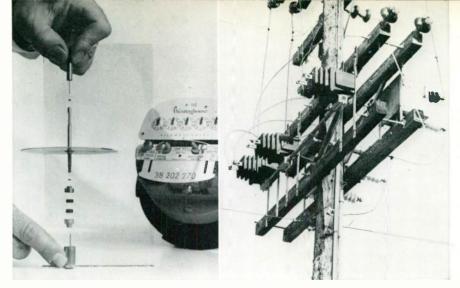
Type D2S Class 200 watt-hour meter, with its magnetic thrust bearing components exploded at left. From top to bottom are the upper mount with its guide pin, upper guide journal, disk and shaft assembly, lower guide journal, upper magnet cup, upper magnet, lower magnet, lower magnet cup, and lower mount with its guide pin.
